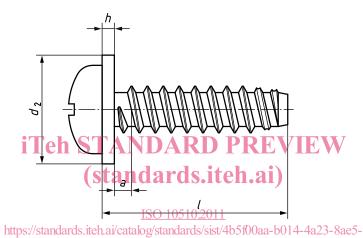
Cross-recessed pan head tapping screw, for example with flat end (type F)
